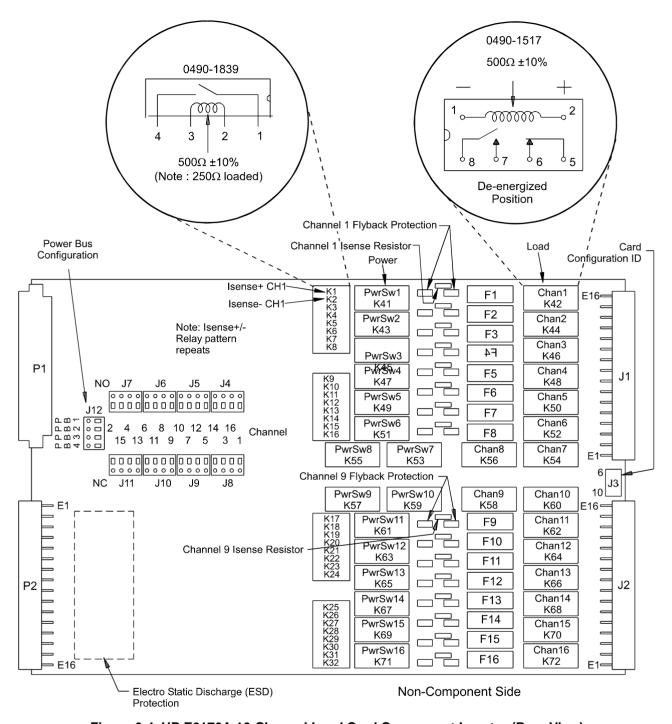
HP E6176A 16-Channel Load Card Component Locator (Rear View)
